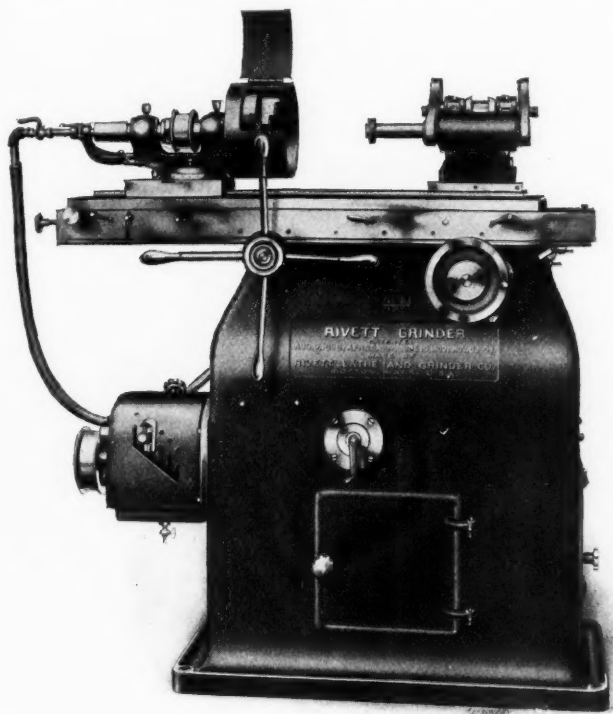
Front View of Machine showing Gear-box and Operating Levers
